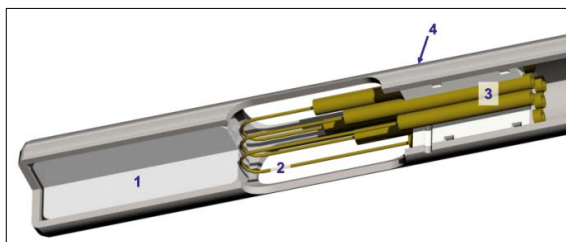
Probe head containing three U-shaped wire sensors. 1) Permanent magnet, 2) U-shaped tungsten wire, 3) brass sockets and 4) stainless steel housing.
